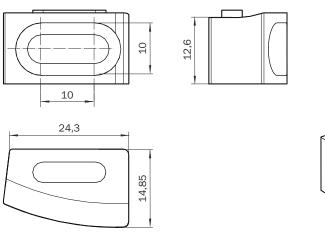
Dimensional drawing of O-Fix bracket (mm), part number 2045835
